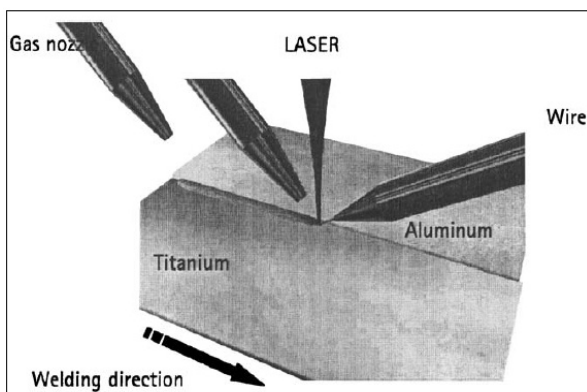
Set up for joining Titanium and Aluminum in butt joint configuration
